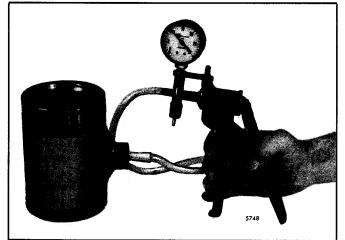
Checking Piston Pin Retainer for Proper Sealing using Tool J 23987-01
